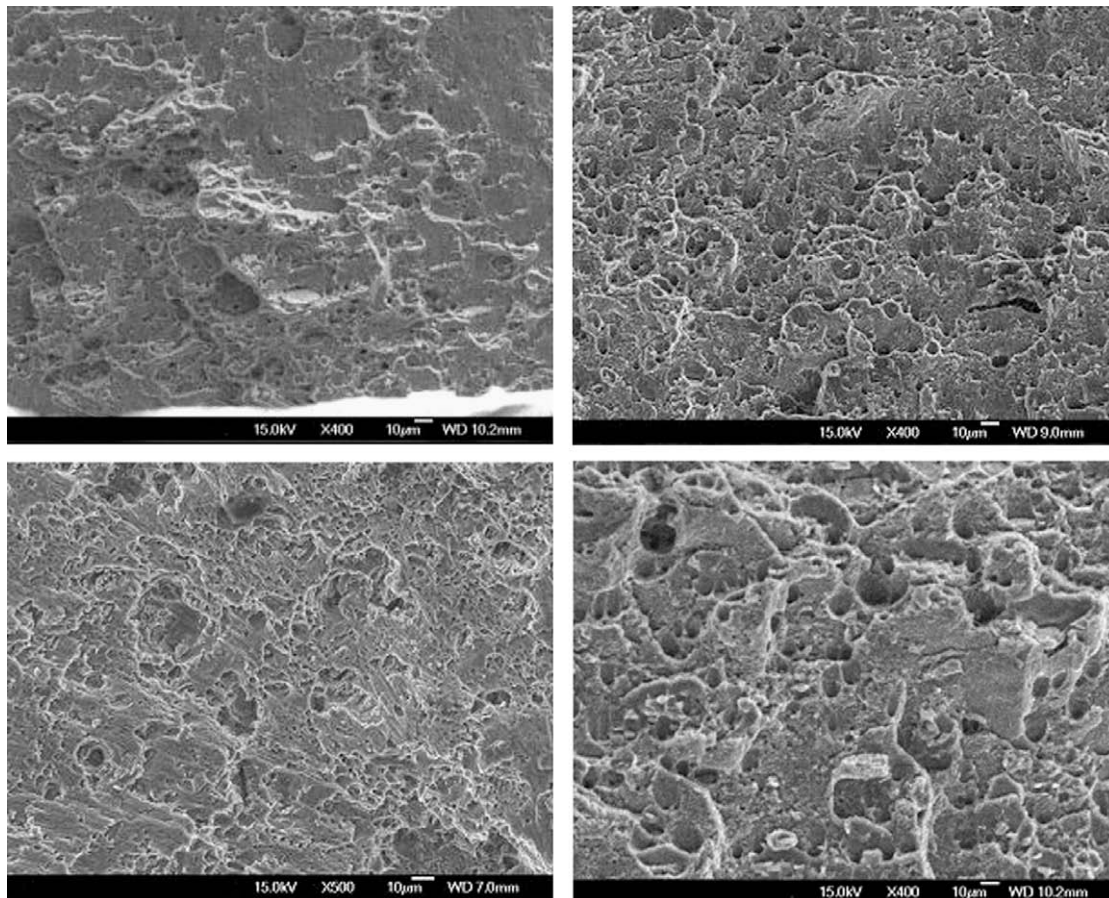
Fracture surfaces of the tensile tested specimens, respectively: AA2024–AA6082 80 mm/min, AA2024–AA6082 115 mm/min, AA6082–AA2024 80 mm/min, AA6082–AA2024 115 mm/min.
